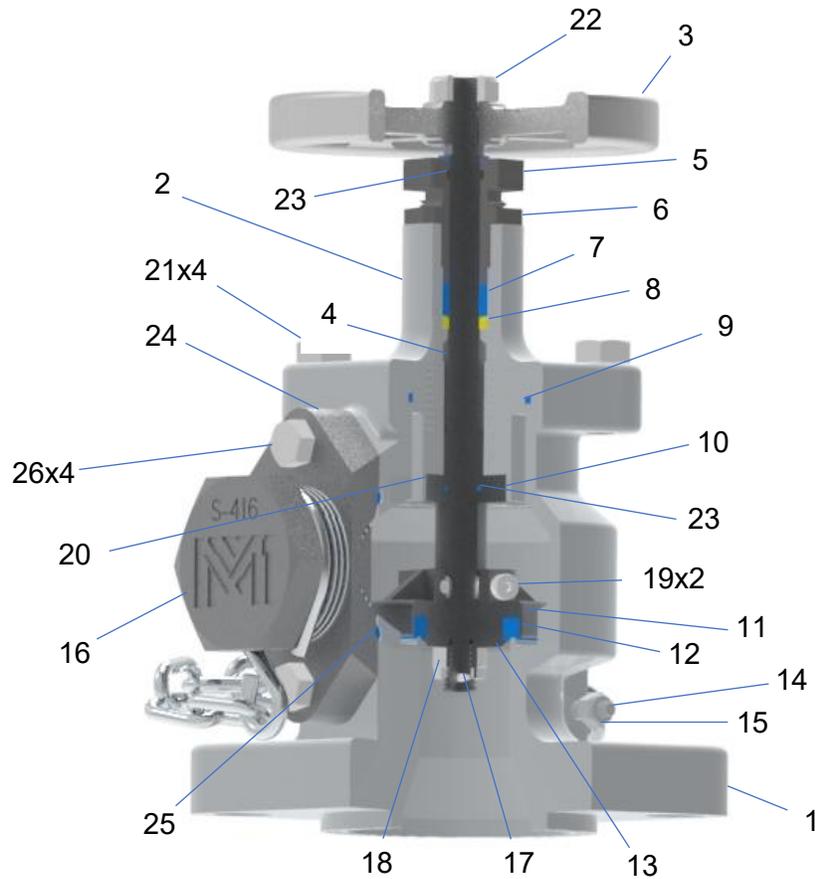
2" Rising Stem Angle Valve Component Symbols
